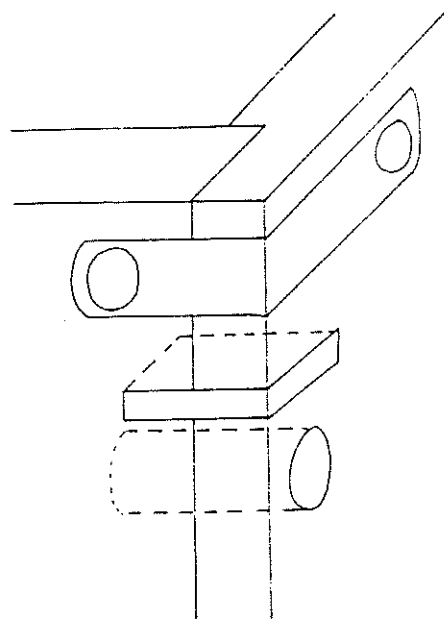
Rebated butt joint illustrated with corner bracket, tenon and dowel that could have been used for fixing.
